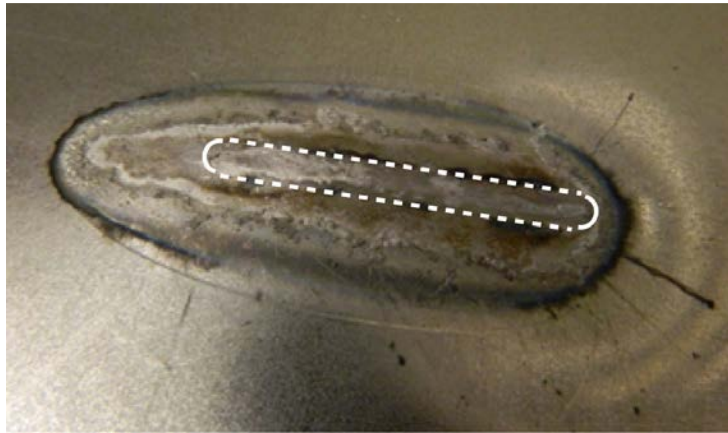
Photograph of 16 gage sheet with failed weld subject to “direct shear through the body of weld.” The failure occurred on a shear plane parallel to and between the two sheets of metal, instead of tearing the 16 gage metal around the perimeter of the weld. The dashed outline encloses the direct shear failure plane.
